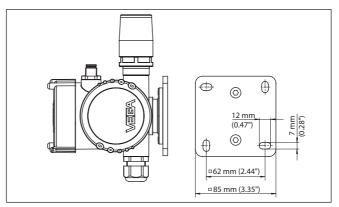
PLICSMOBILE T81 for wall mounting, bottom view of mounting plate.
